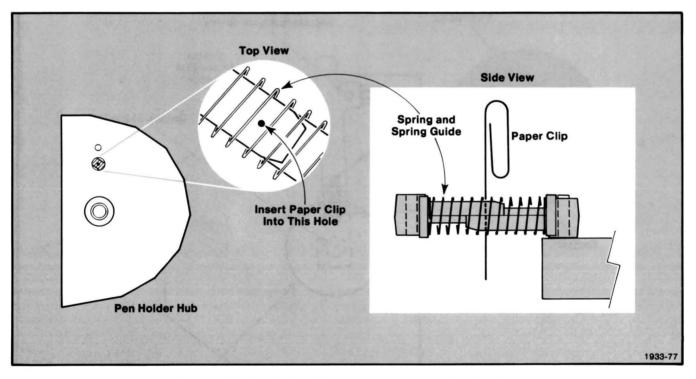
Pen Holder Hub Spring and Spring Guide Details.
